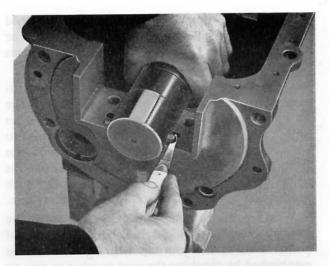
Cutting the oil seal ends flush with the bearing joint face. The seal must then be smeared liberally with the recommended lubricant
